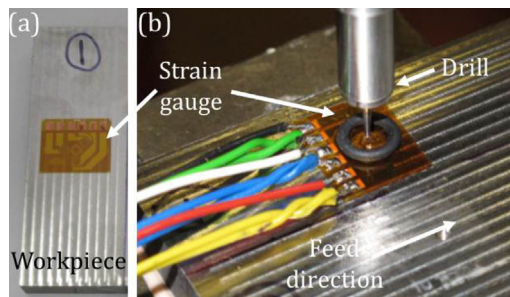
Residual stress measurement showing; (a) workpieces with strain gauges attached; (b) drilling setup.
